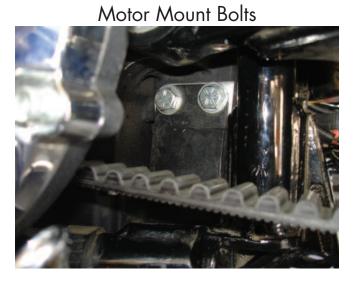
Rear motor mount bolts. Remove the bottom bolt first. Replace the bottom with the  $3/8'' \times 16 \times 2''$  long round head allen stainless steel bolt included in the kit, before removing the top bolt. This sequence will prevent the motor from dropping. Slide on the frame bracket in Fig 2.
